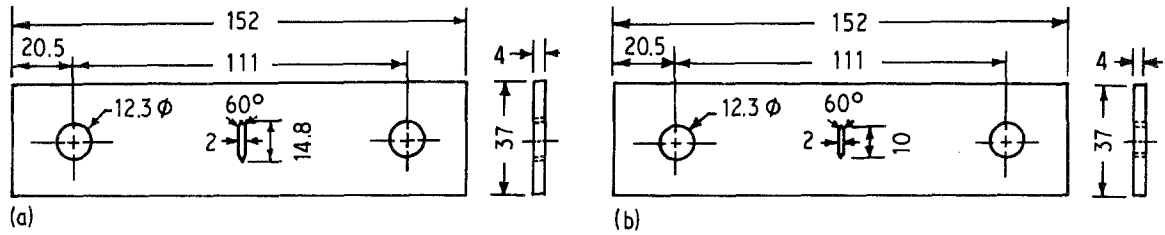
Specimen configurations for (a) fracture toughness and (b) fatigue crack growth.
